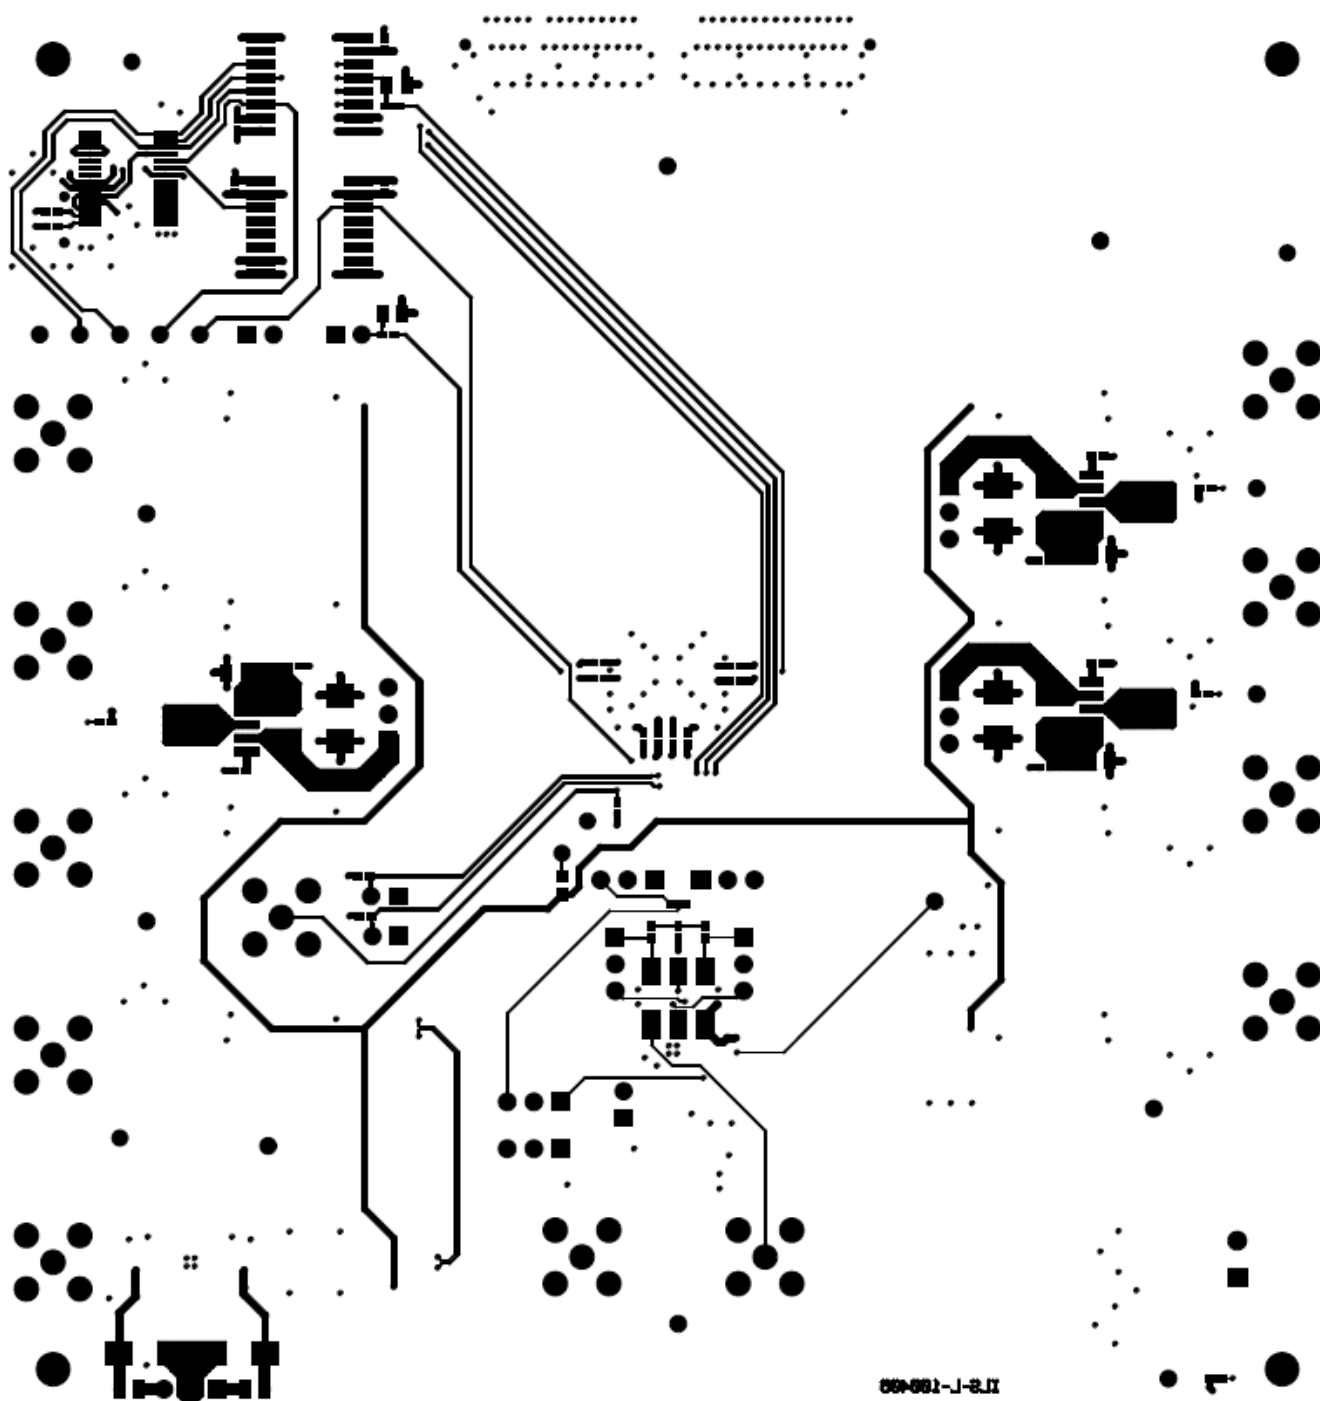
ADS5295EVM Bottom Layer Copper – Bottom View
